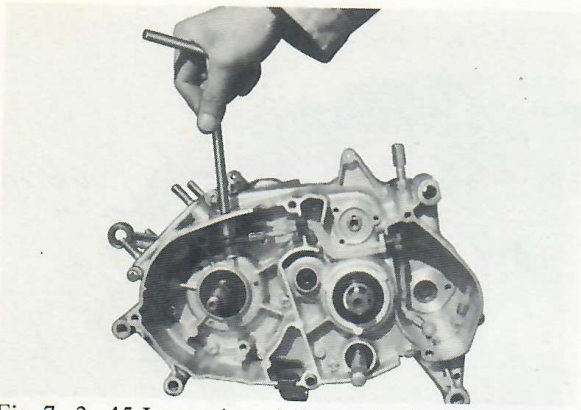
Loosening oil line union bolt with 8 mm wrench
